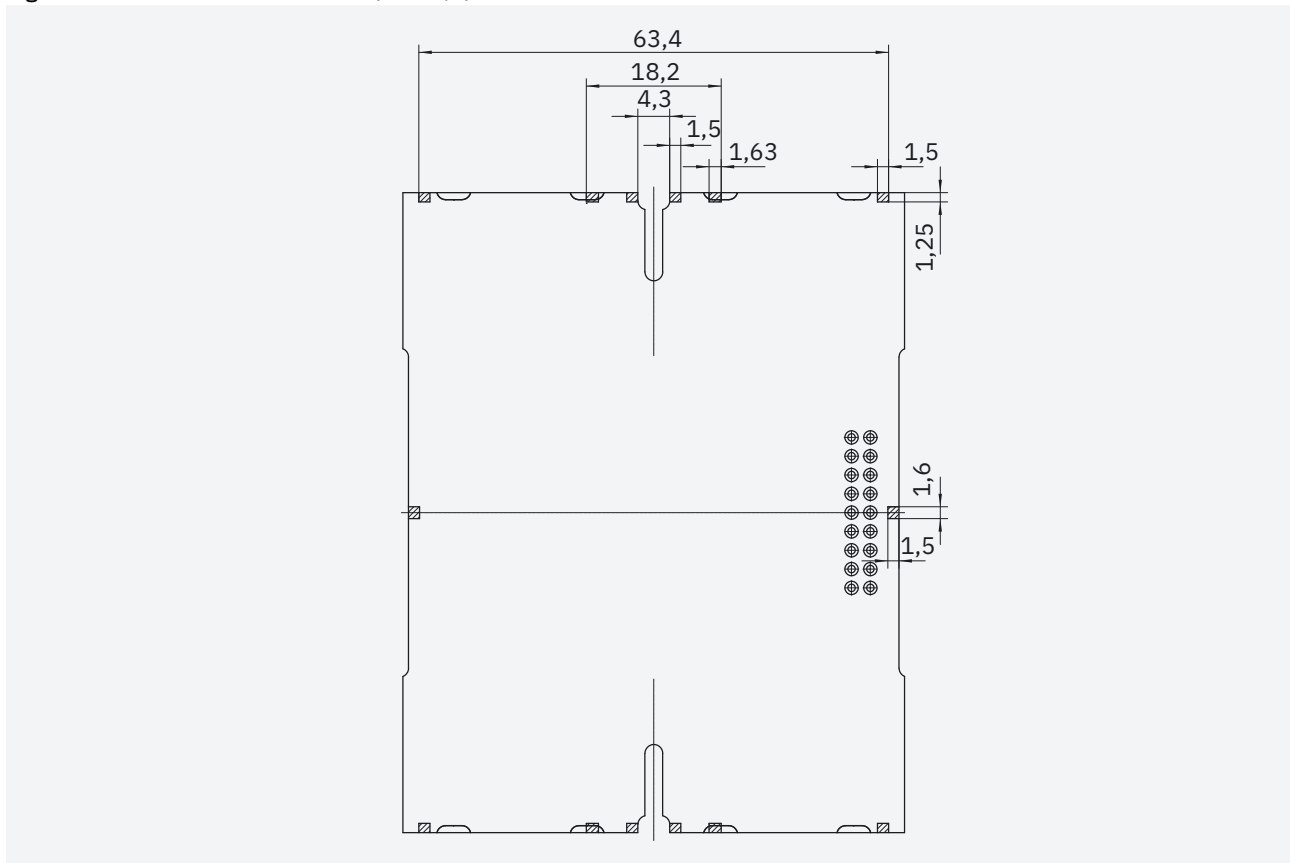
Dimensions of PCB 1 (BC 71,6) – lower side
